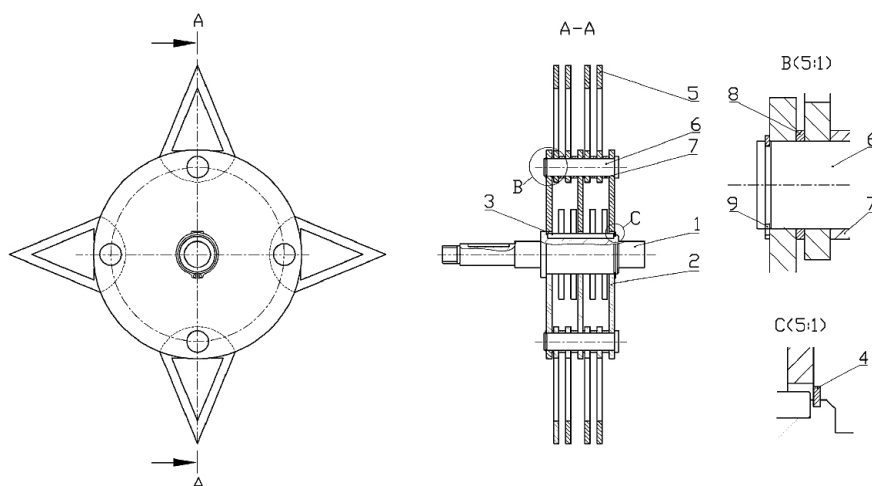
Design solution of the new hammer shredder rotor with hammers in the shape of a circular section $\varphi = 45^\circ$ (construction developed by co-author of the paper according to own patent [22]; 1-rotor shaft, 2-rotor support disc, 3-prismatic key, 4-stopper ring, 5-hammer, 6-pin, 7,8-spacer ring, 9-stopper ring)
